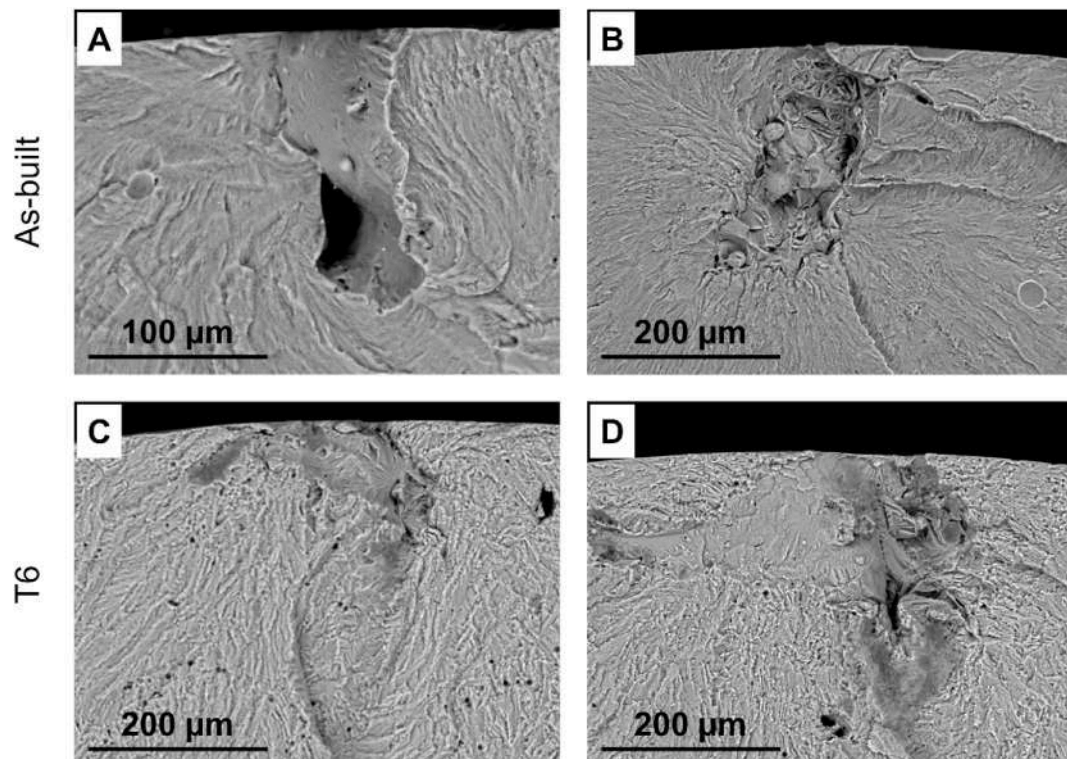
Fracture surfaces of “early broken samples”: first zone with triggering defect. A) XY-AB; B) Z-AB; C) XY-T6; D) Z-T6.
